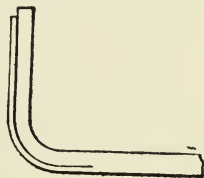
LAMINATED STEEL BOILER PLATE.
